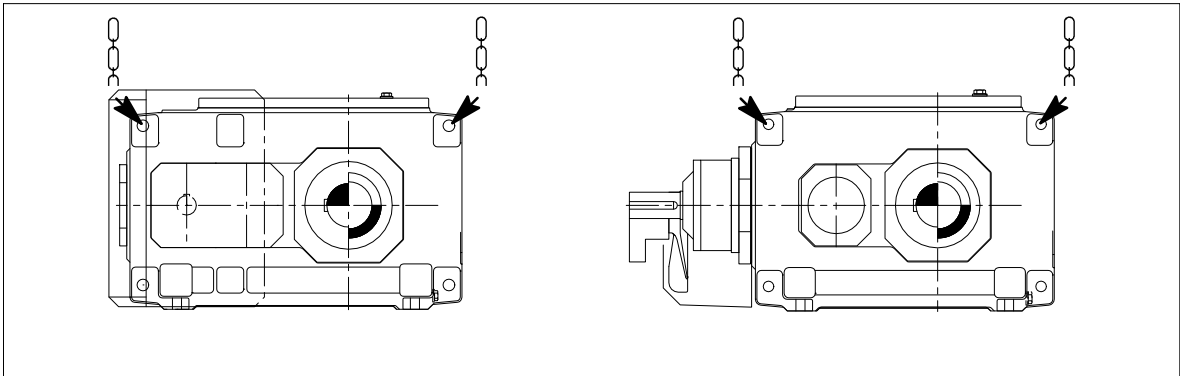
Attachment points on gear units of types H4.. and B4.. up to size 514 and H2.., H3.. and B3.. of sizes 513 and 514
